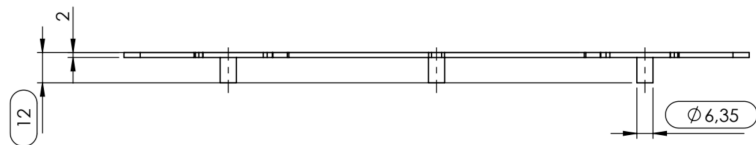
Smart Antenna Mounting Bracket Option 2 - Top View
